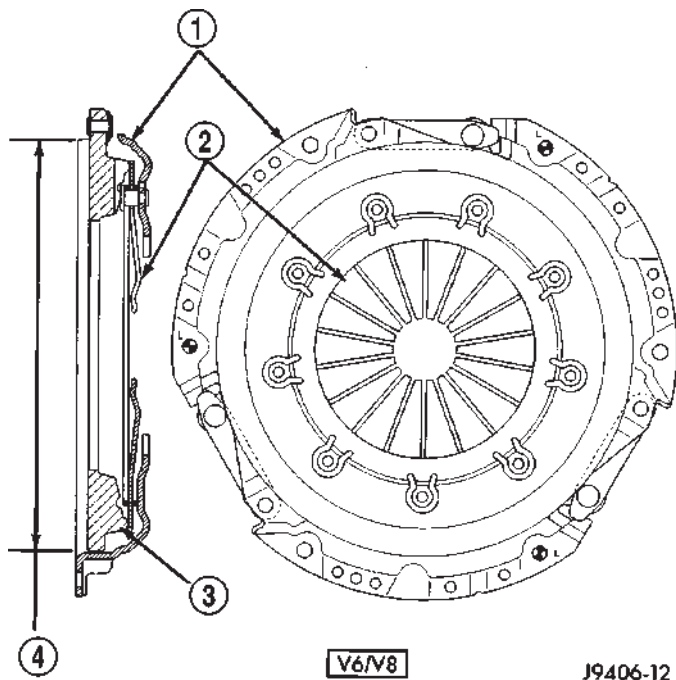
Pressure Plate - V6/V8 Gas Engine
